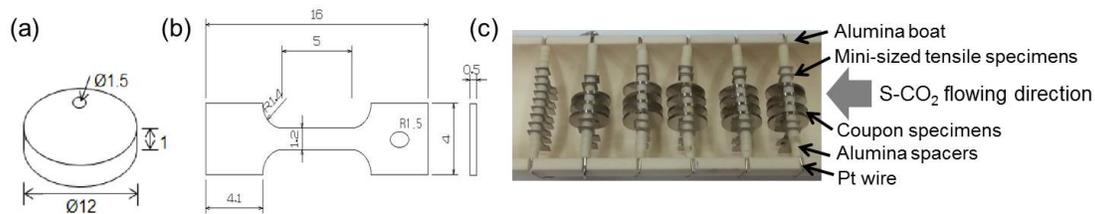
Geometry and dimensions of (a) coupon and (b) mini-sized tensile specimen (in mm) and the photograph of installed specimens on alumina boat
